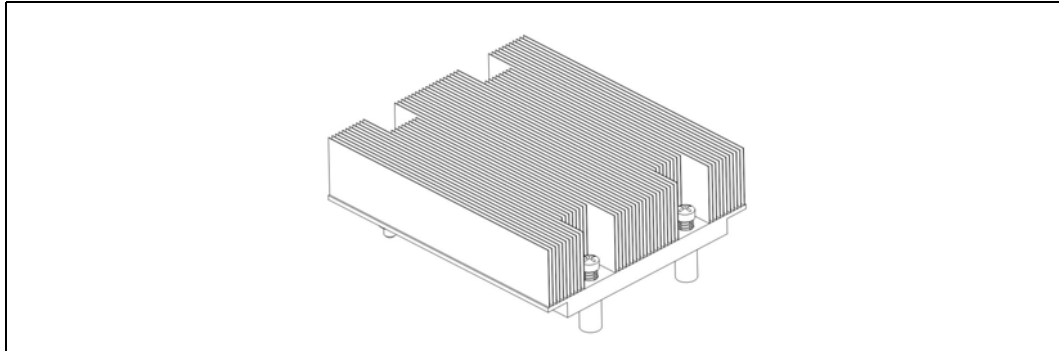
Isometric View of the 2U+ CEK Heatsink
